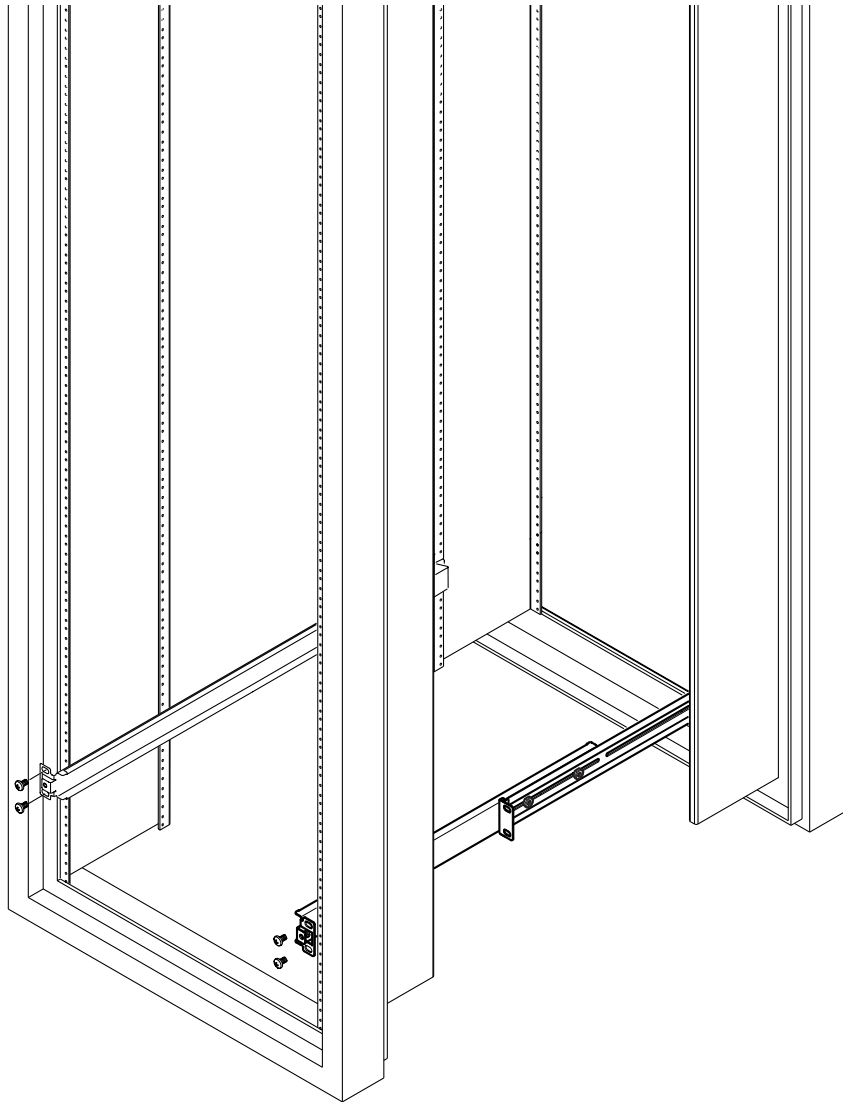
Fastening the Slide Mounts to a Sun StorEdge 72-inch Expansion Rack – Front View (Side Panels Removed for Clarity)
